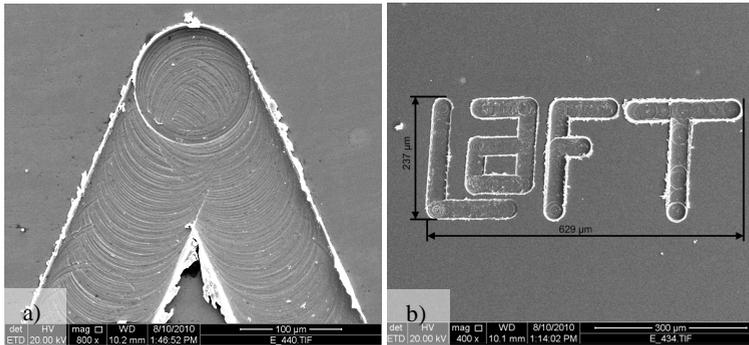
Top corner of the diamond shaped workspace milled with a 120 μm tool; logo of the institute done with a 20 μm tool (SEM)
